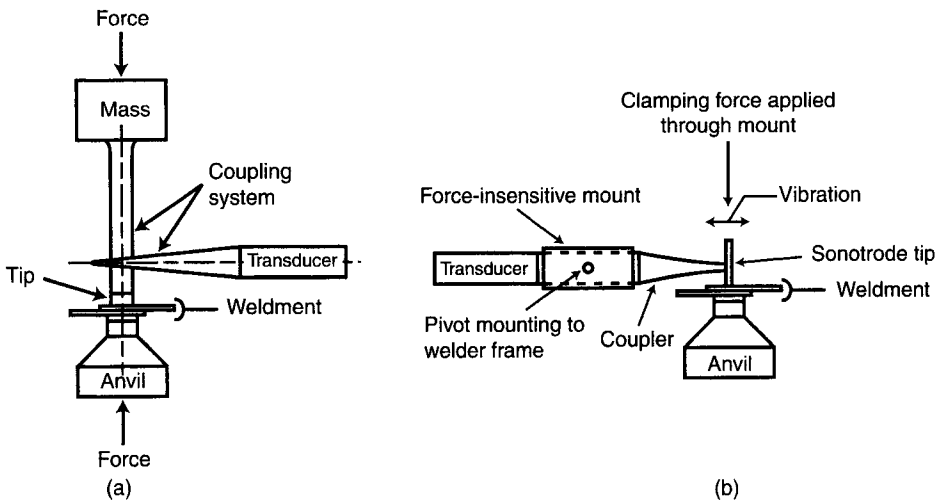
General arrangement for ultrasonic welding: (a) wedge reed ultrasonic spot welder, (b) lateral drive ultrasonic spot welder.
